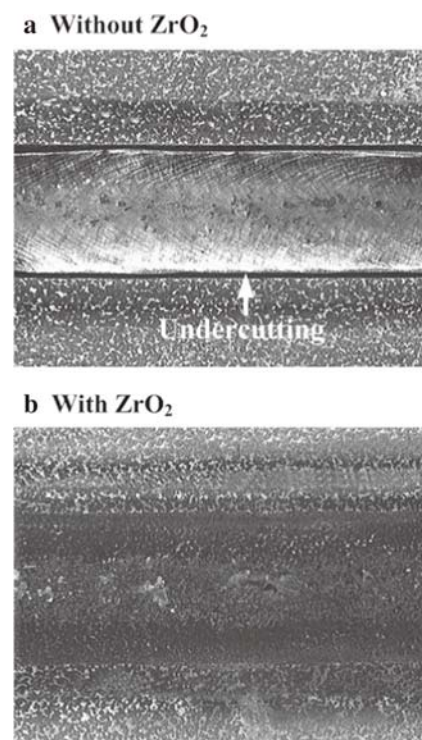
Appearance of TIG welds produced with and without ZrO_2 at a welding current of 350 A and a travel speed of 600 mm/min
